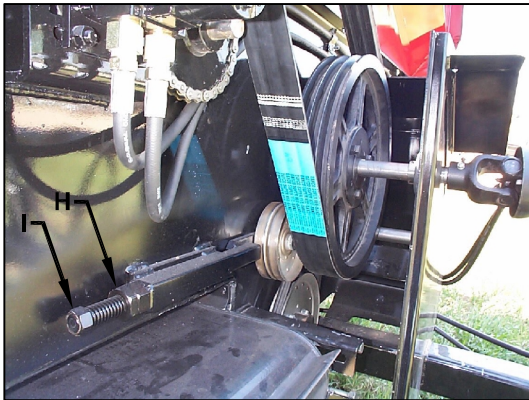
CONVEYOR DRIVE COMPONENTS
